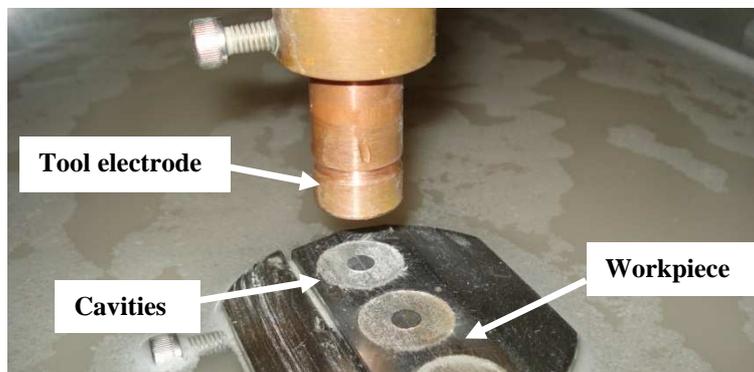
Picture illustrating the tool electrodes and the machined part with the cavities being highlighted
